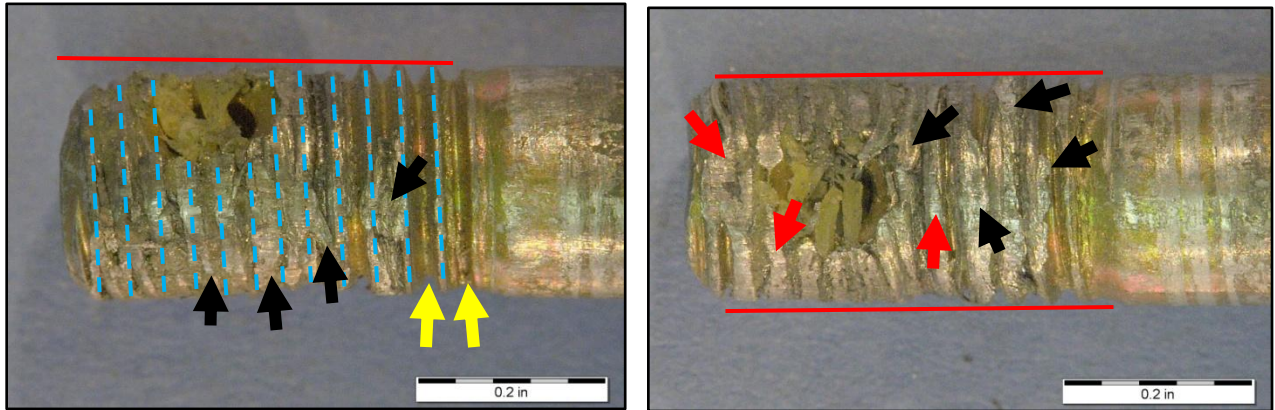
Two views of the threaded end of the bolt in the red box in Figure 34.
